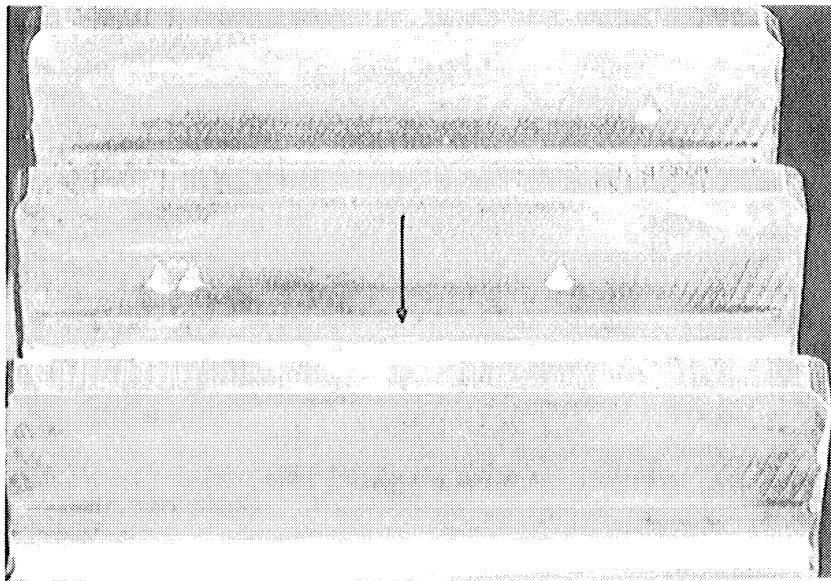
Heavy drive gear showing arrow-head pits pointing towards tip of gear (arrow indicated direction of rolling).
